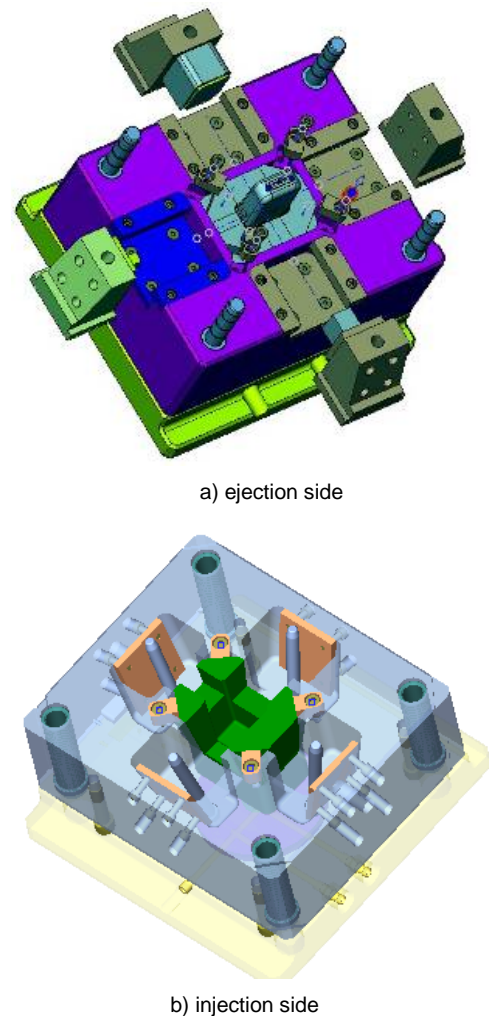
Hybrid mould: a) ejection side; b) injection side
